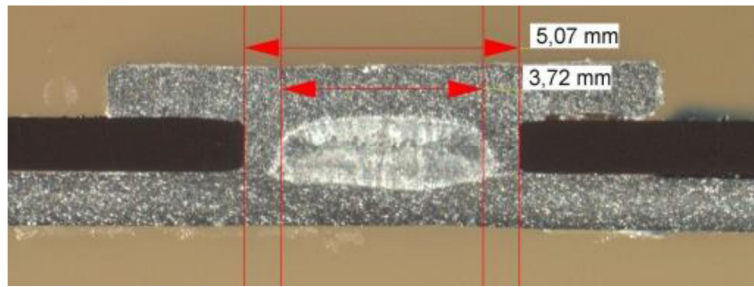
Resistance element welding of copper to aluminium (Source: LWF)
